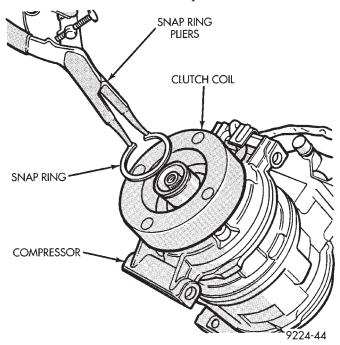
Clutch Coil Snap Ring Remove/Install INSPECTION
